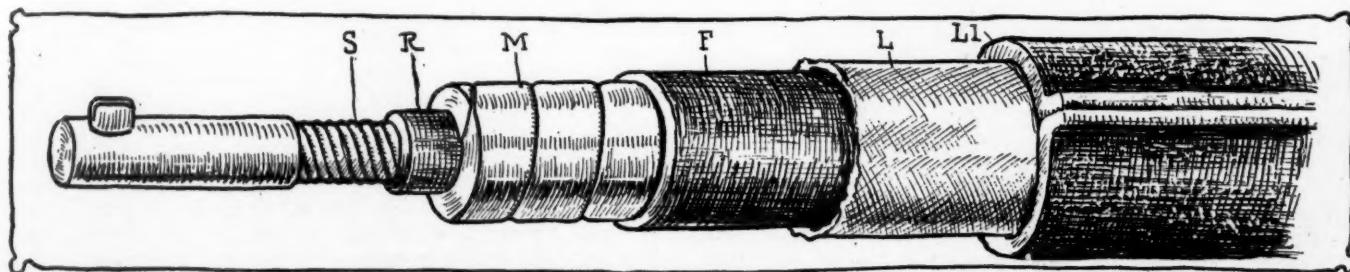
New driving shaft of Hoffecker speedometer and flexible casing
